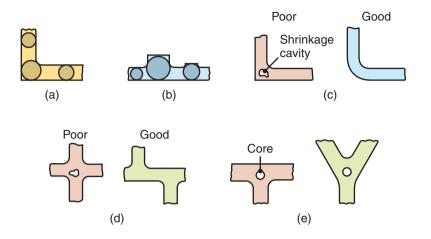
Examples of designs showing the importance of maintaining uniform cross sections in castings to avoid hot spots and shrinkage cavities. (a) Illustration of the method of inscribing the largest possible circle in a cross section; locations where abrupt changes in circle size occurs are concerns for hot spots and shrinkage pores. (b)–(e) Common geometries and strategies for reducing or eliminating pores.
